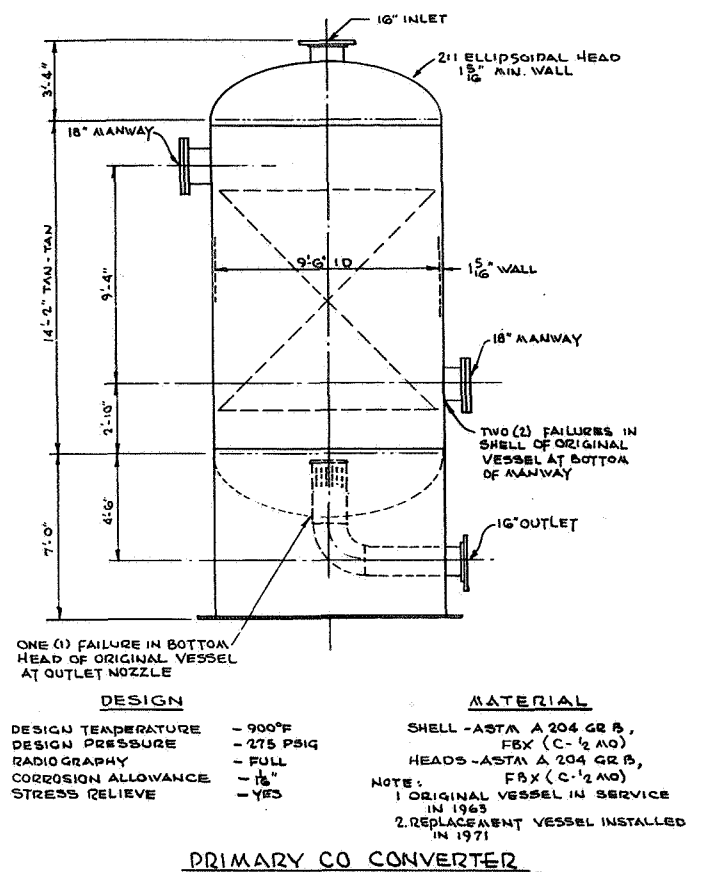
The shift converter that sustained three failures, two at the lower manway, and one in the bottom head on the outlet nozzle.
